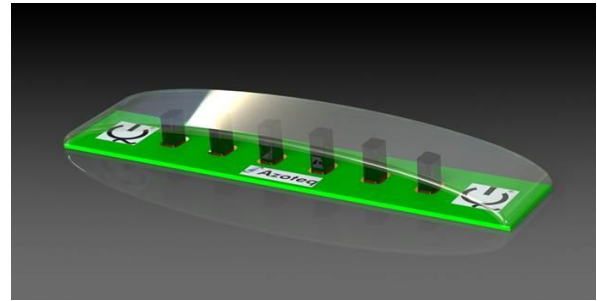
Conductive rubber can be used to remove small air gaps between the overlay and the PCB.
